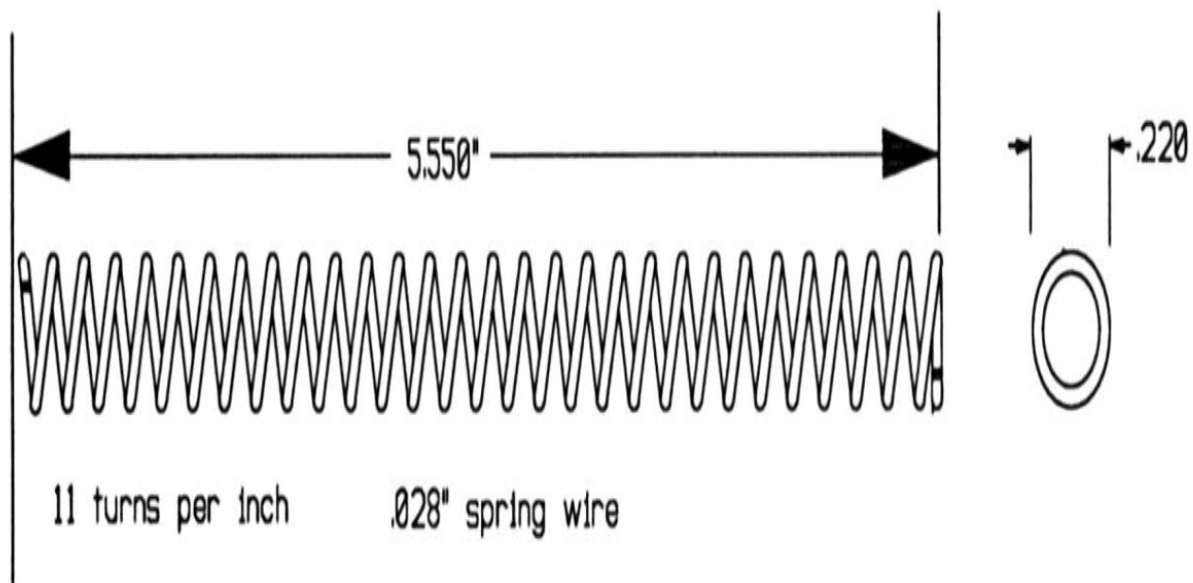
Dimensions of recoil spring that will operate most Savage/Stevens semiautomatic rimfire rifles.
